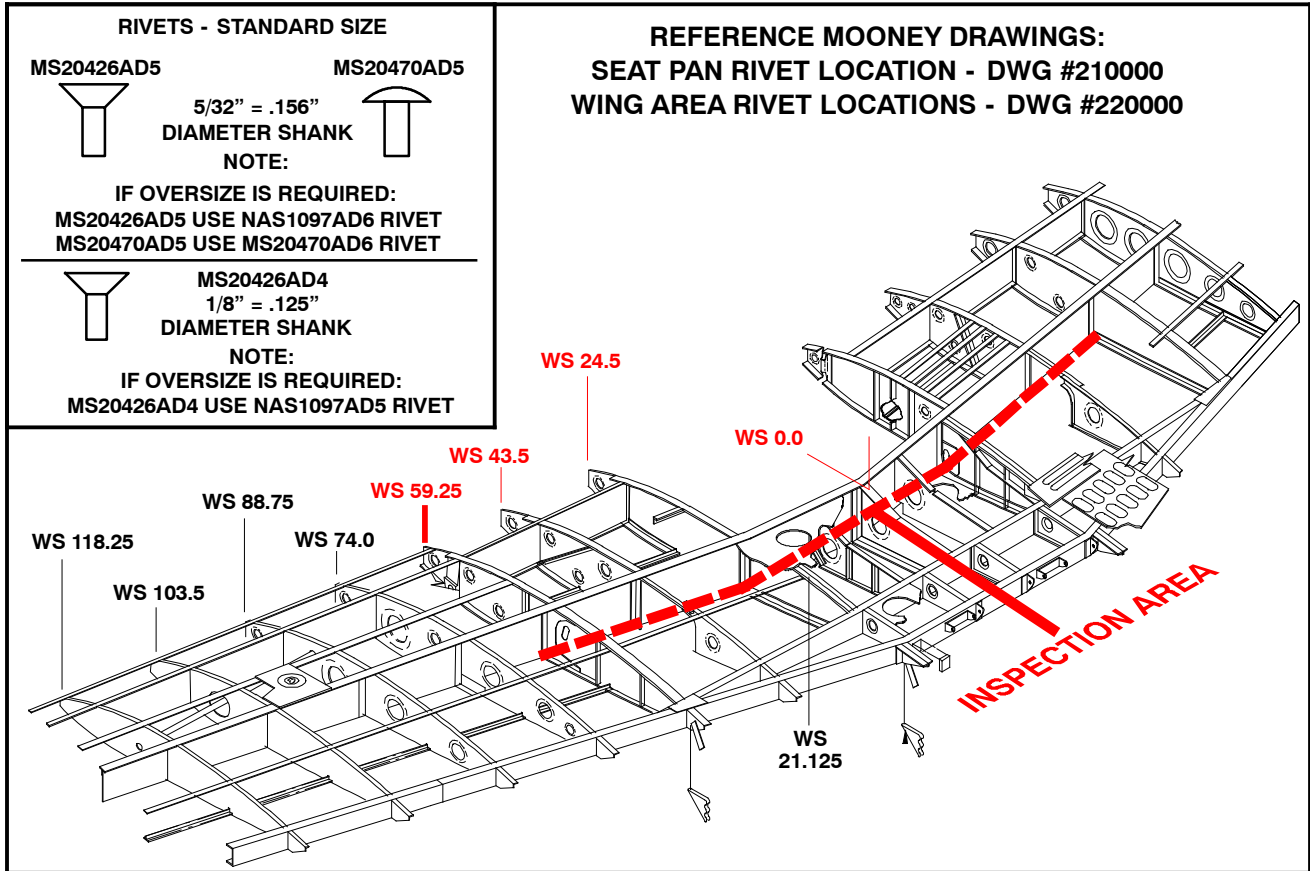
LOWER SPAR CAP RIVET LINE AND RIVET IDENTIFICATION
